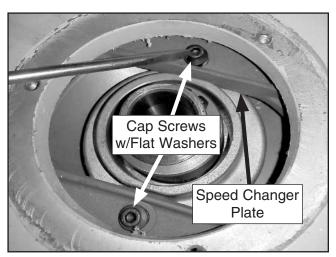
Cap screws must be removed from speed changer plate before disassembling headstock.
